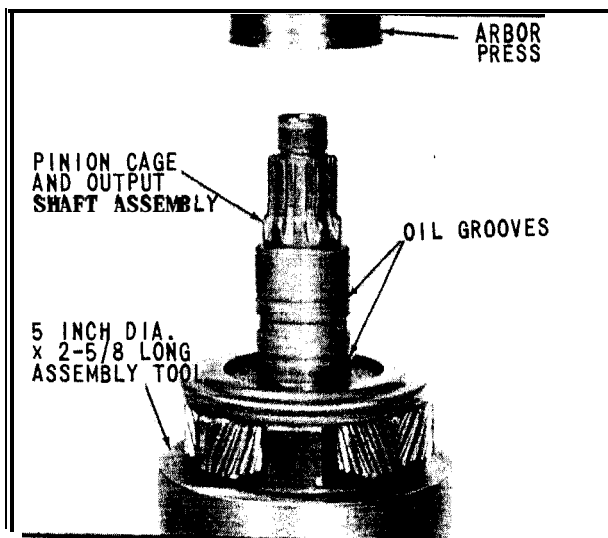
Pinion Cage and Output Shaft Assembly with Oil Grooves
